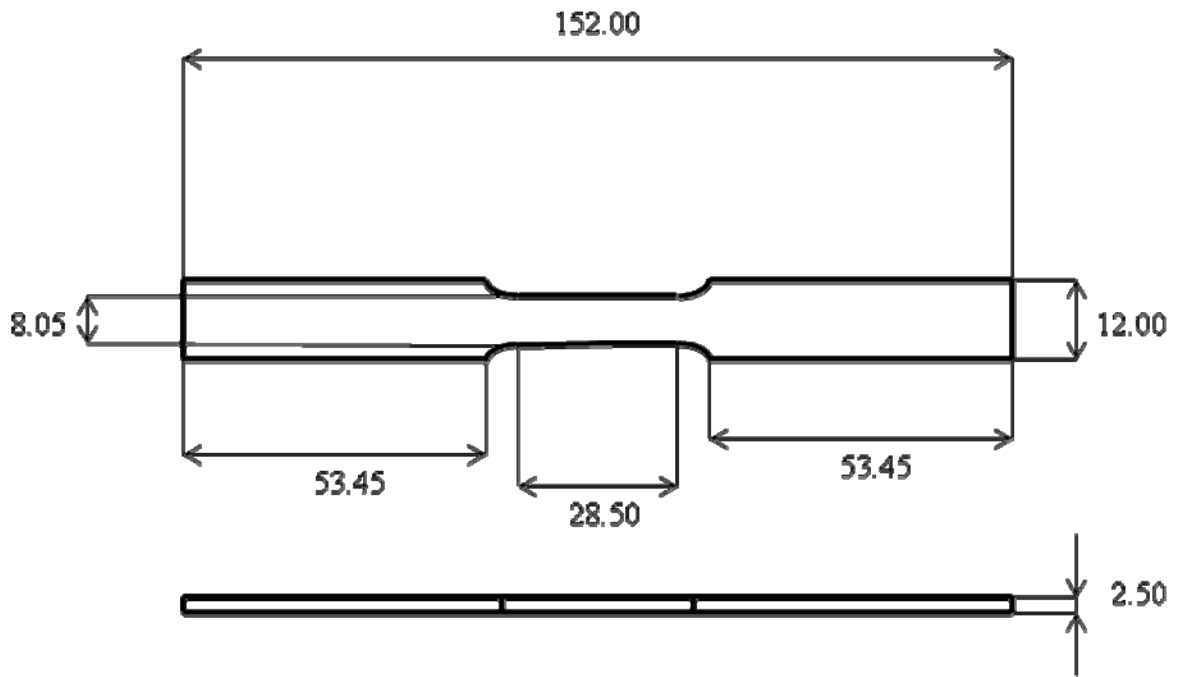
Composites C1 and C2 test specimen, all dimensions in mm.
